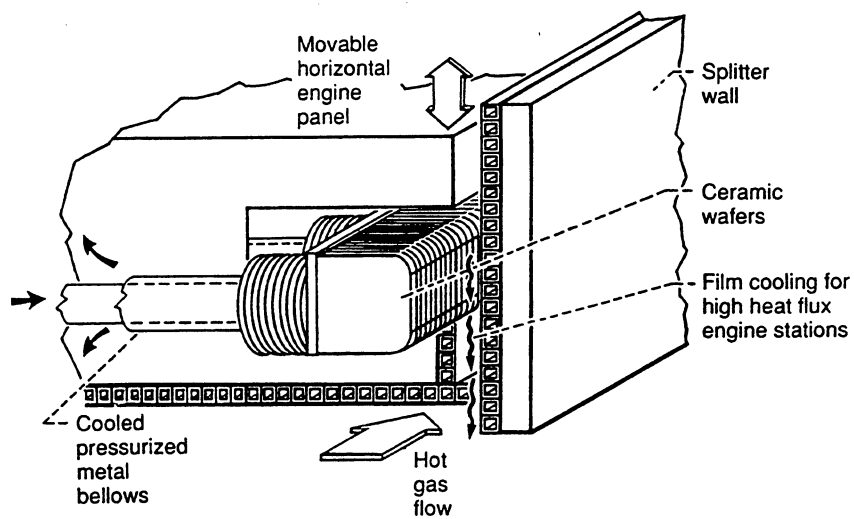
Isometric of ceramic wafer seal installed in the movable engine panel.
